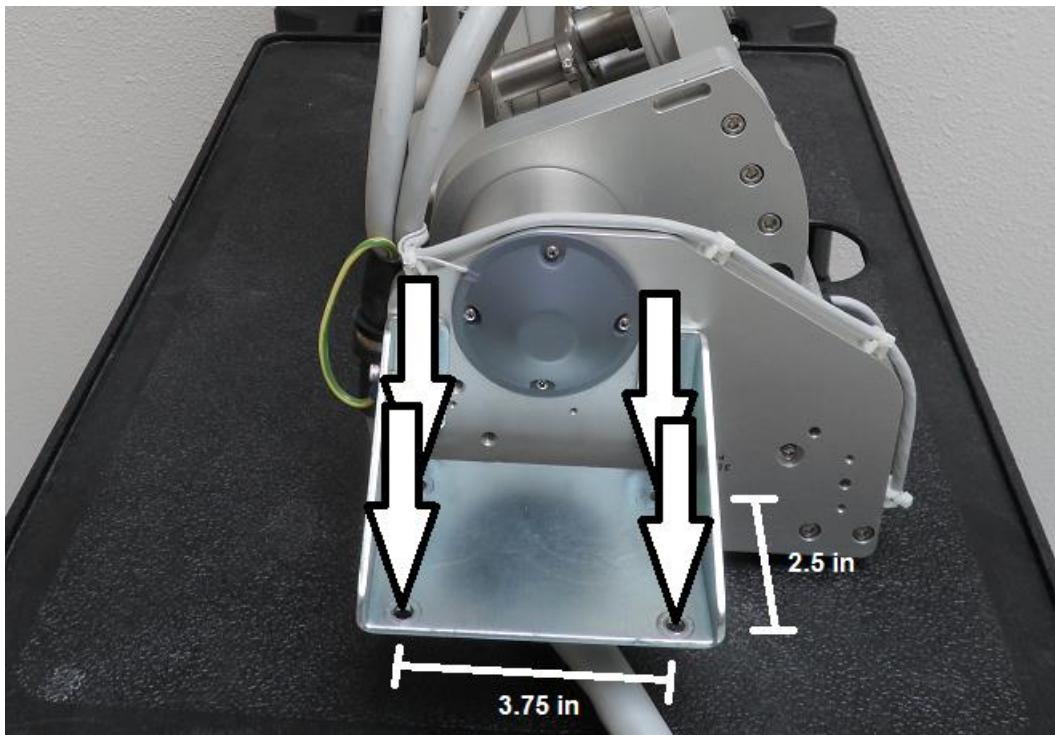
MTM TOP VIEW - ANGLE BRACKET AND MOUNTING HOLES.
